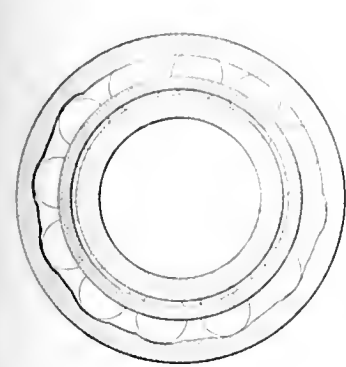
Bearing with Outer Ring Grooved to permit the Use of a One-piece Separator
